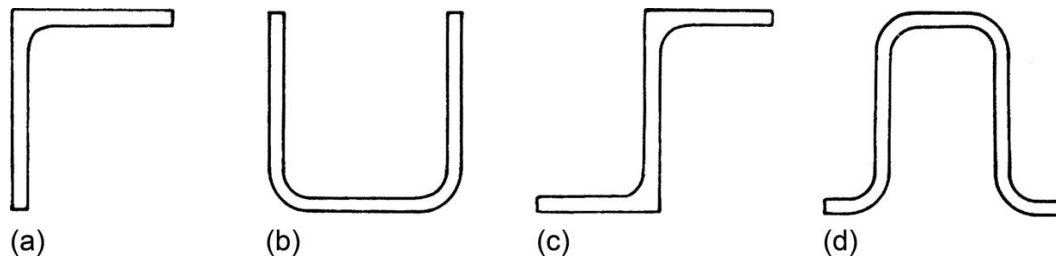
(a) Extruded Angle; (b) Formed Channel; (c) Extruded Z; (d) Formed “Top Hat”
